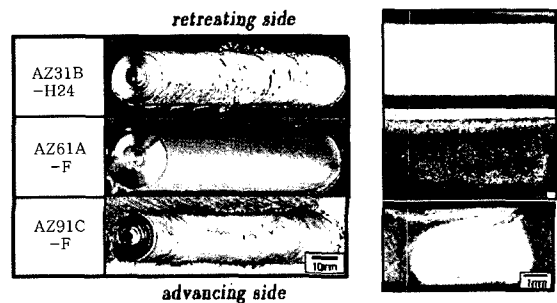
Bead appearance and macrostructure of cross-section of each bead
